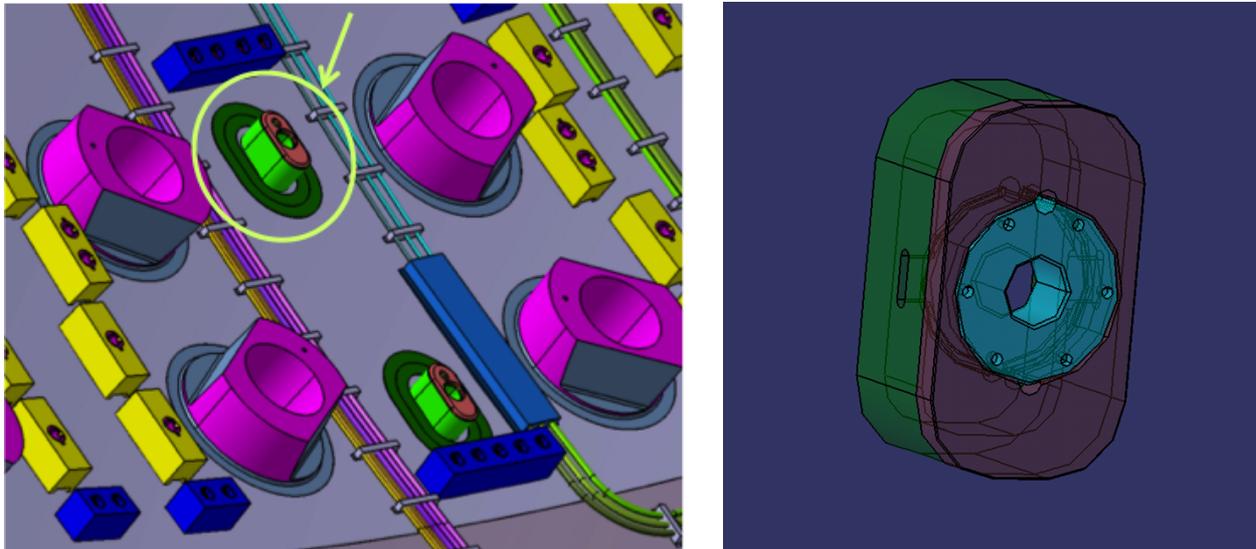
Blanket electrical pedestal on VV wall (left) and detail (right).
